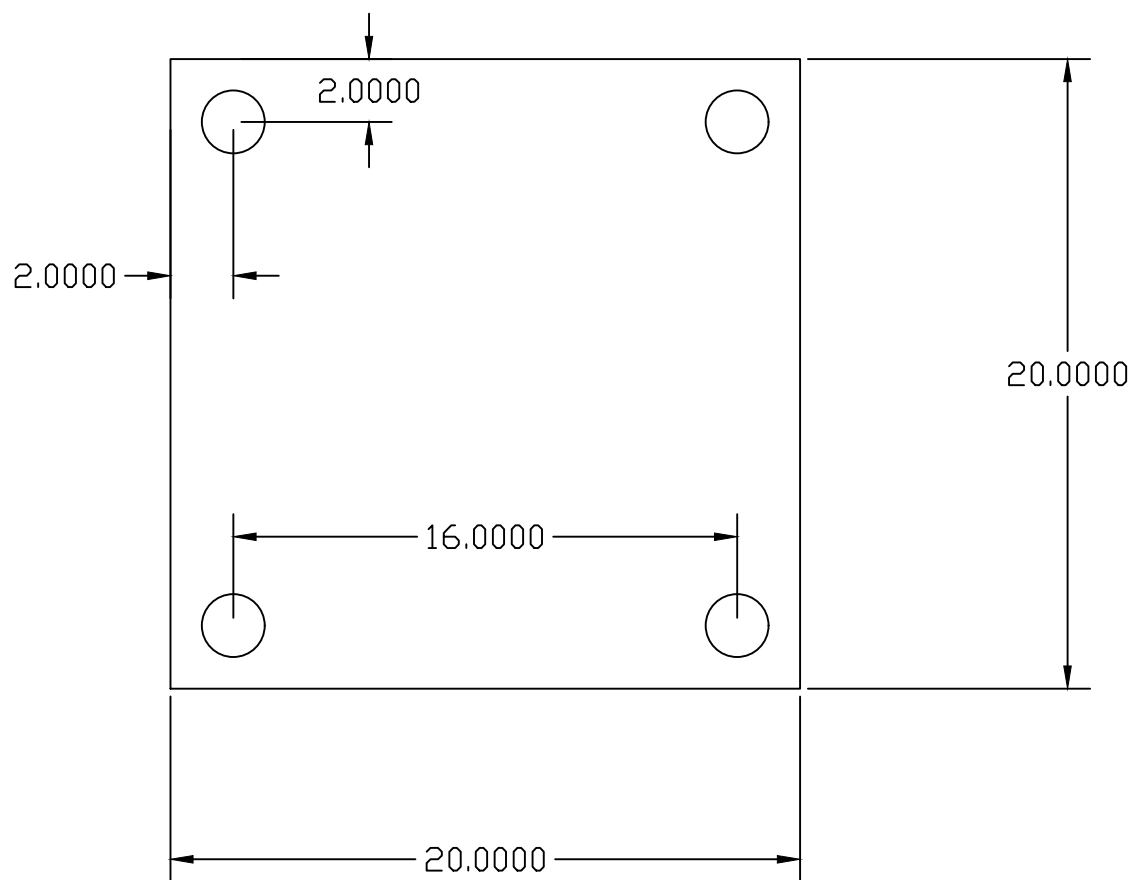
Driven element quartz surface drawing with dimensions in mm
